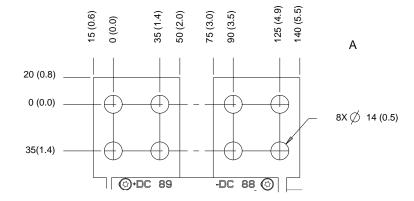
E4h Load Share/Regen Terminal Dimensions (Side Views)
